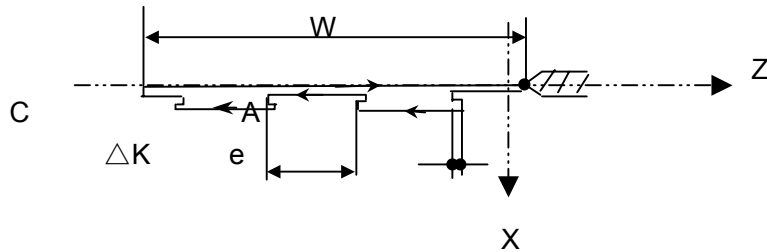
Cutting Path in End Face Peek Drilling Cycle
